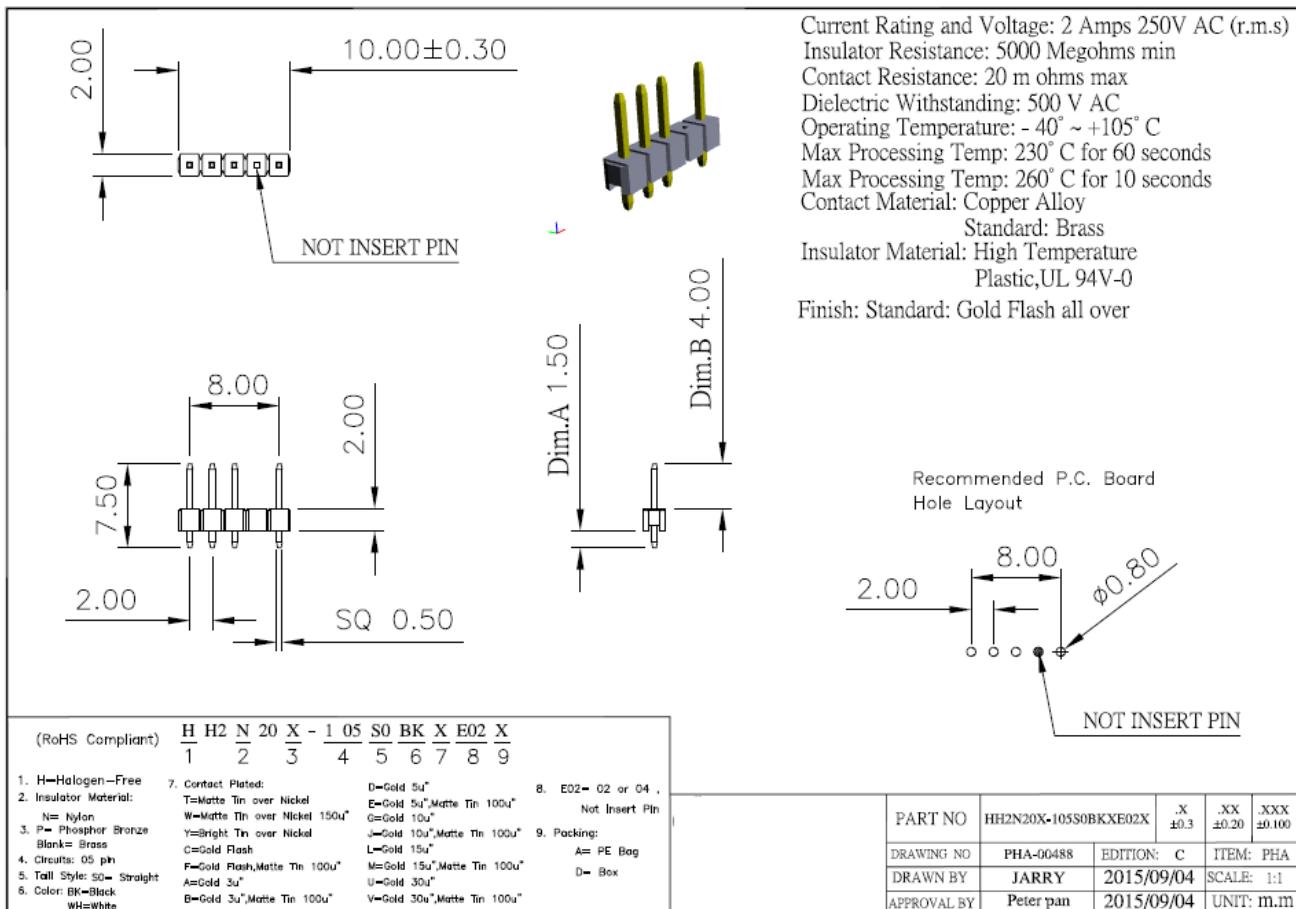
Wire to Board SMD 1\*4P Connector Drawing (CN1/CN2)
